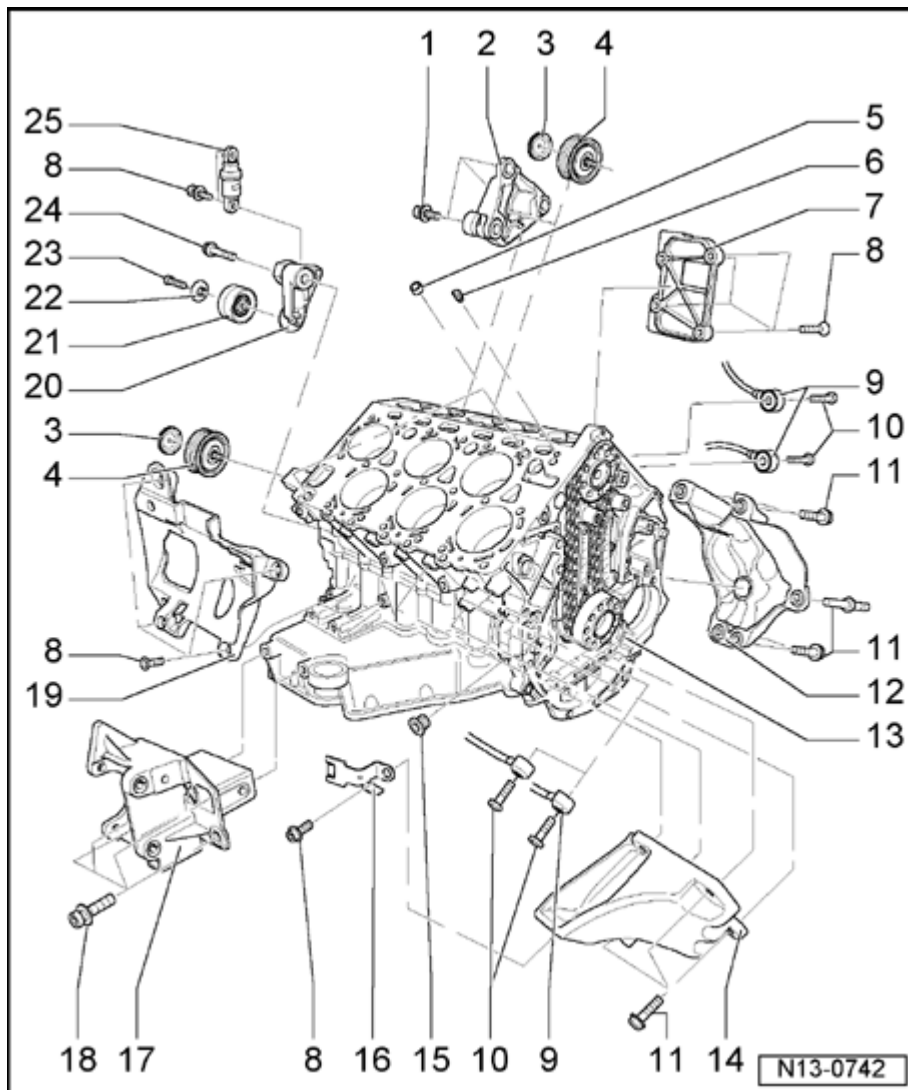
Engine Remove/Install ComponentsCourtesy of VOLKSWAGEN UNITED STATES, INC.
